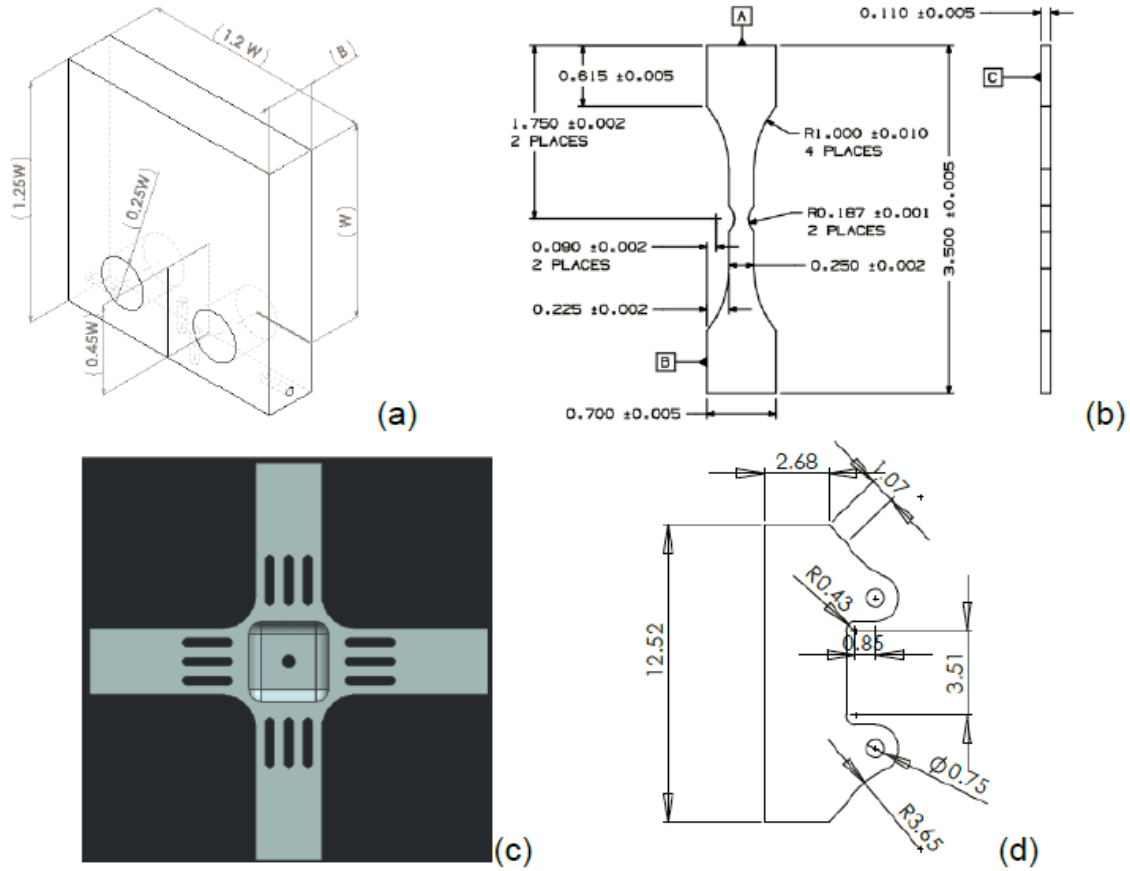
Typical geometries used in the mechanical testing. (a) CT specimen ( $W=25.4$  mm). (b) Notched dogbone (dimensions in inches). (c) Miniature cruciform sample (sample arms were three inches long). (d) Large lug-joint (dimensions in inches). The small lug-joint had all dimensions scaled down by a factor of three.
